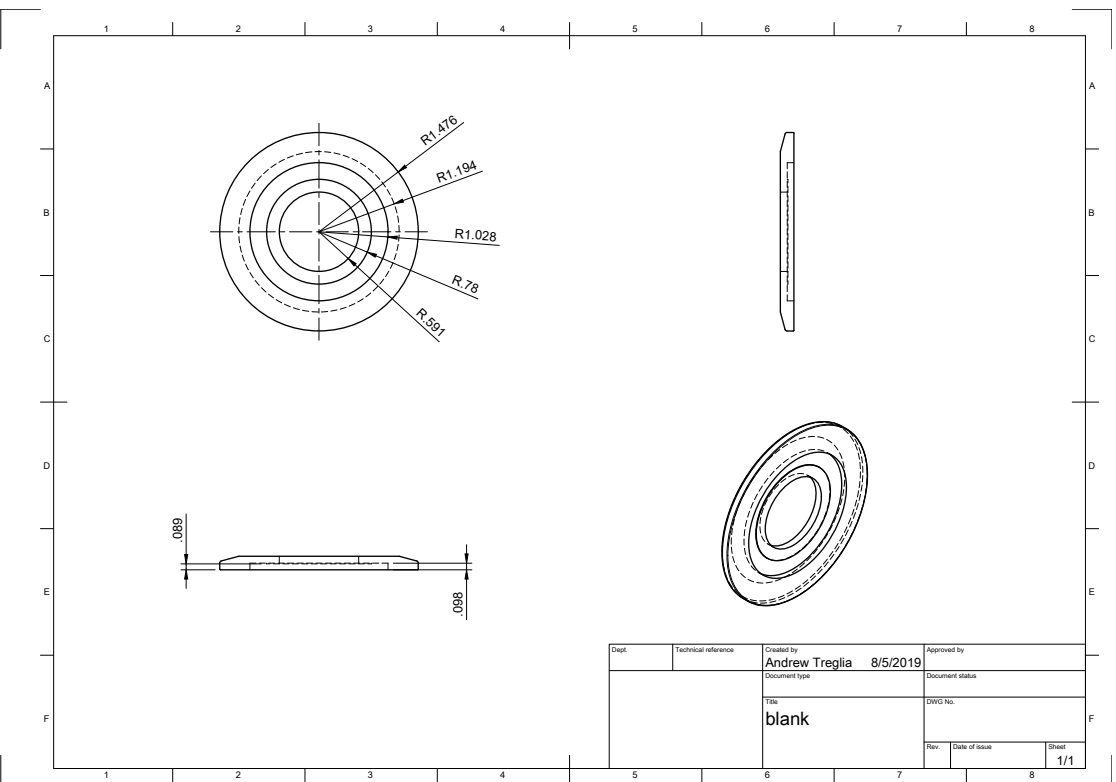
Part 3/5: CAMEA ATM—KF50 Blank Flange. Blueprint of custom KF50 Blank Flange with removed window. Mates with Part 1/5: CAMEA ATM—Sample Stage to ATM adapter (Fig. A.7) via standard KF50 clamp. This is a modification of a standard KF50 Blank Flange with a window removed to allow a transparent elastic film to be secured for air-free Laue imaging and sample reorientation.
